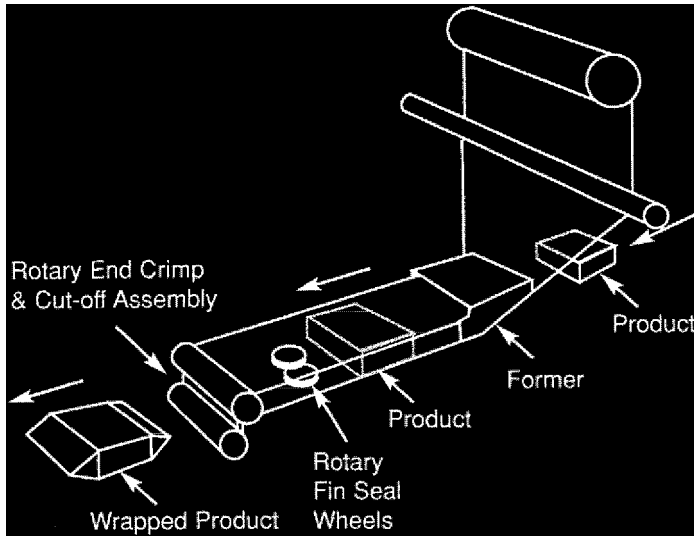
Horizontal, flowwrap type, form/fill/seal machine for solid products. (Courtesy of The Packaging Society.)
